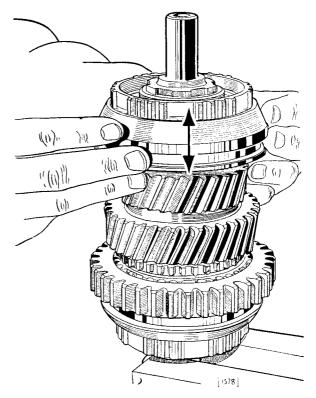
Checking 3rd speed interlock plunger. With 3rd speed engaged there should be approximately $\frac{3}{32}^{"}$ (2.5 mm.) axial movement without drag.
